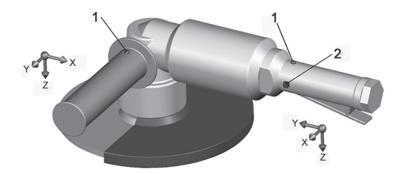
Measurement locations — Electrical angle grinder whose motor serves as main handle
